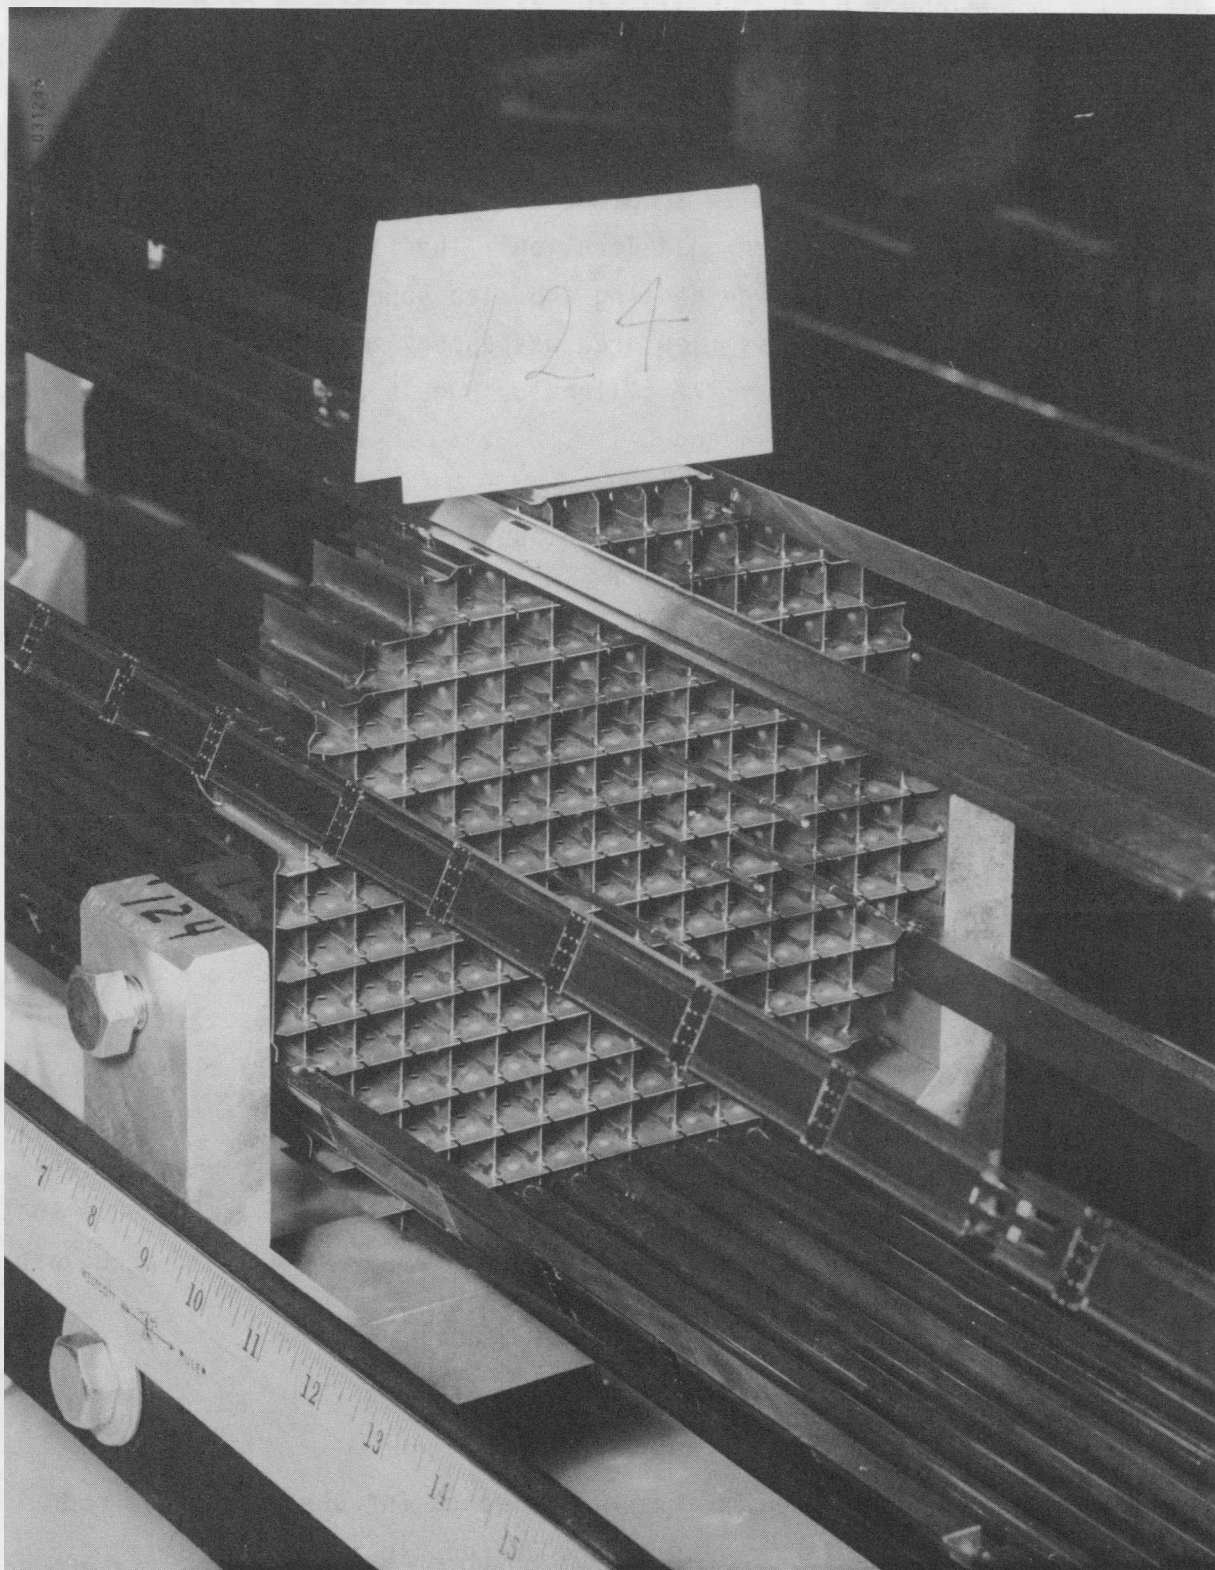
Grid and Filler Rod in Bundle Assembly
